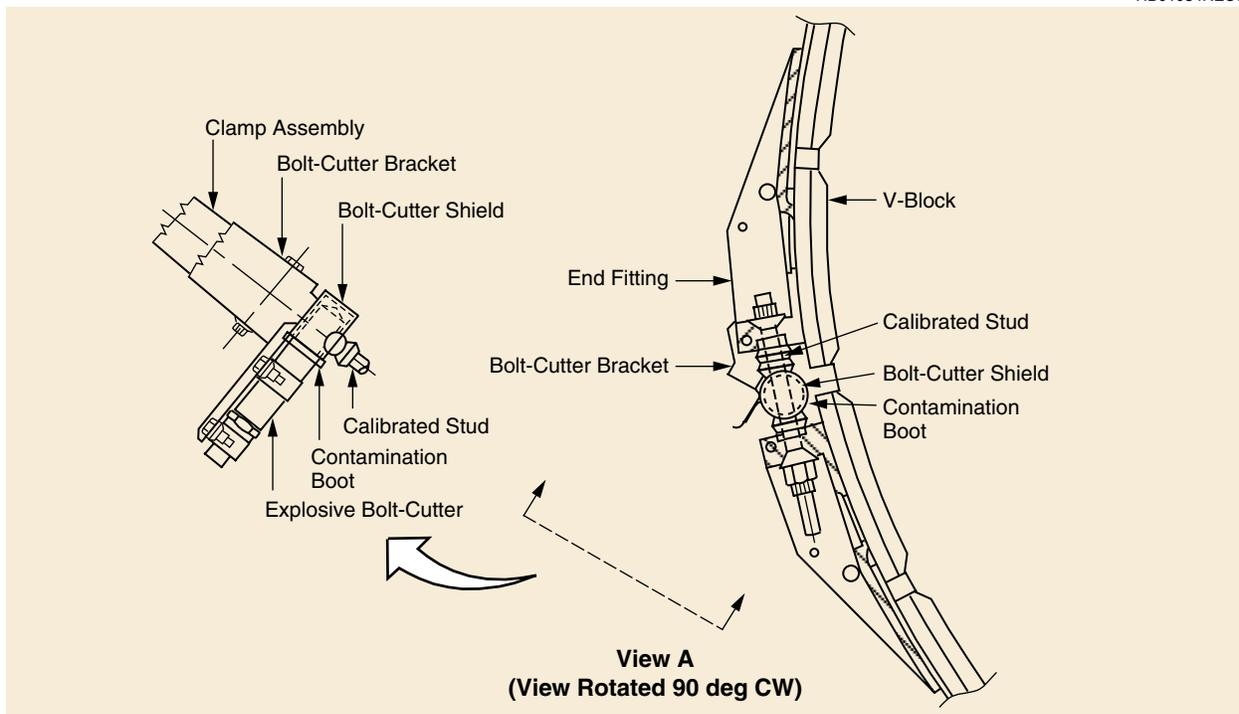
3712 PAF Bolt-Cutter Detailed Assembly
